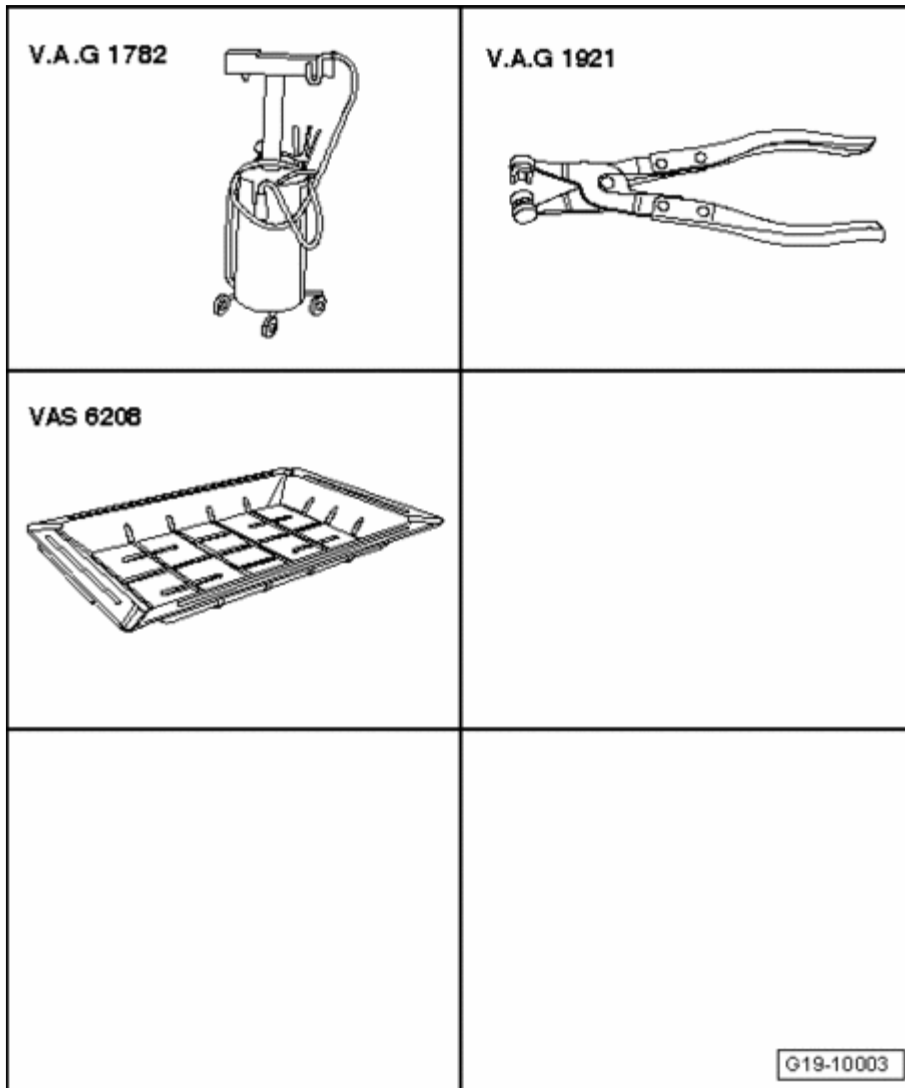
Identifying Special Tools - Radiator, Removing And Installing
